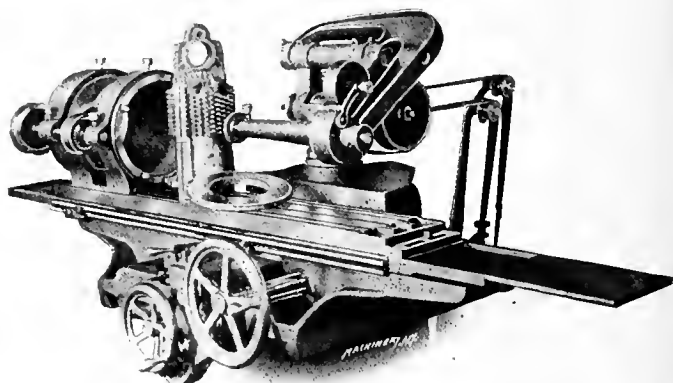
Hollow Spindle Head-stock for Grinding Automobile Cylinders in Thompson Grinding Machine.
